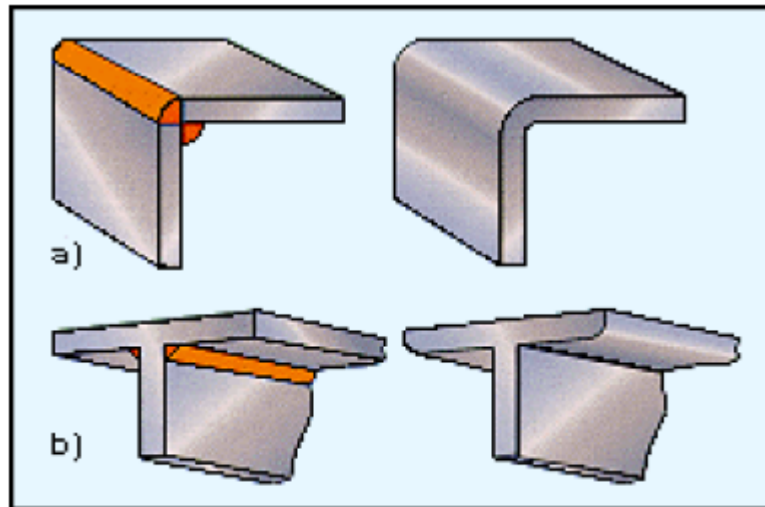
Elimination of welds by: a) forming the plate; b) use of rolled or extruded section
